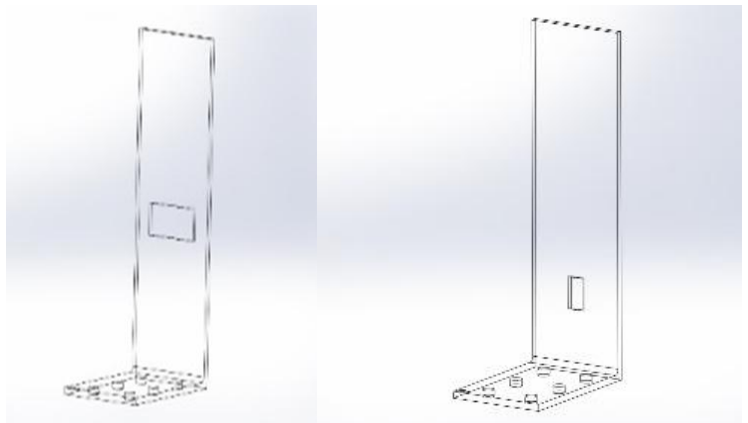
Cross section of the brackets showing a manufactured defect in the (a) bottom section, and (b) middle section.
